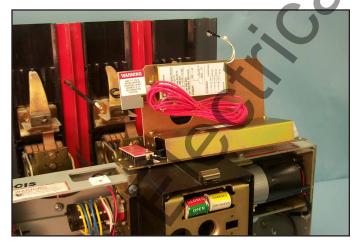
Aux. CT Module Assembly Placed on the Breaker Frame.
